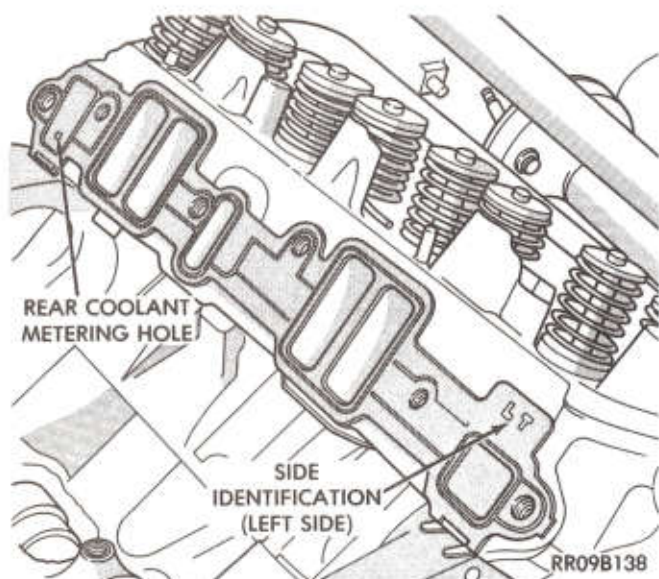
318 Engine Intake Manifold Side Gaskets—Left Side Shown
